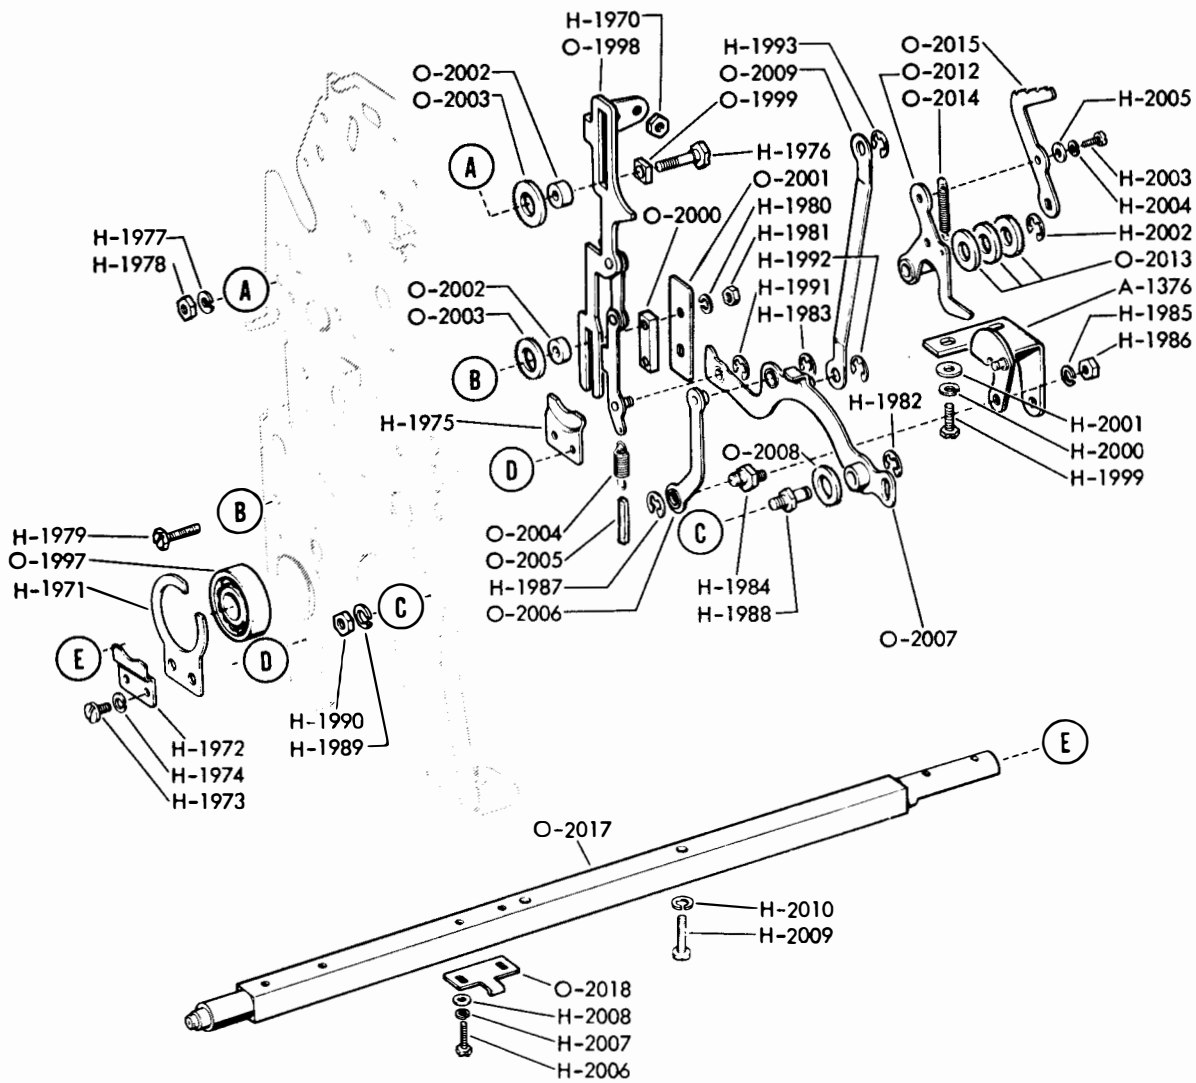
Automatic Typewriter, Left Side Linkage and Stripper Blade Mechanism
